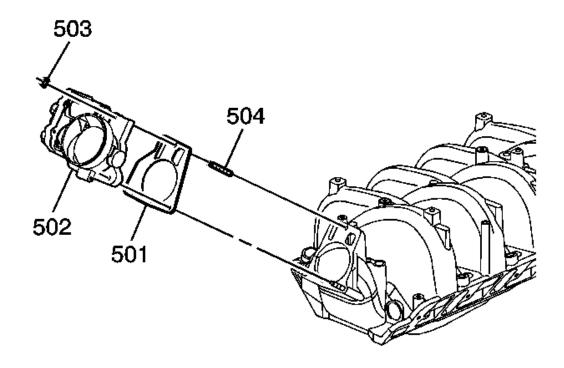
View Of Throttle Body, Nuts, Studs & Gasket Courtesy of GENERAL MOTORS CORP.
